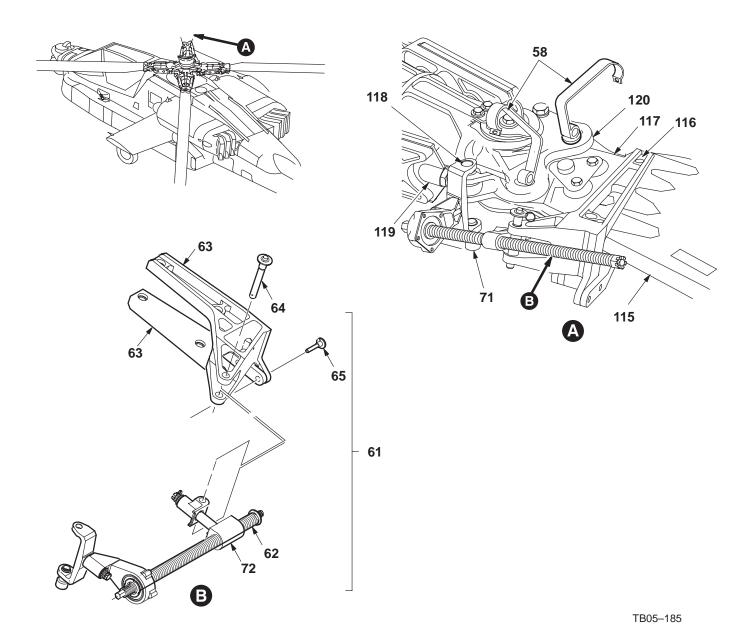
Blade Positioning Assembly on R/H FWD Main Rotor Blade
